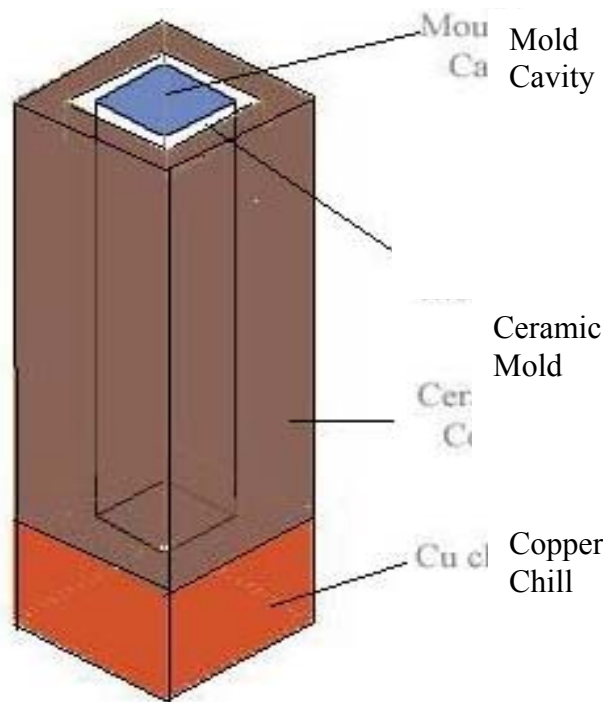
Dimensions and shape of casting mold, used in current investigation.
